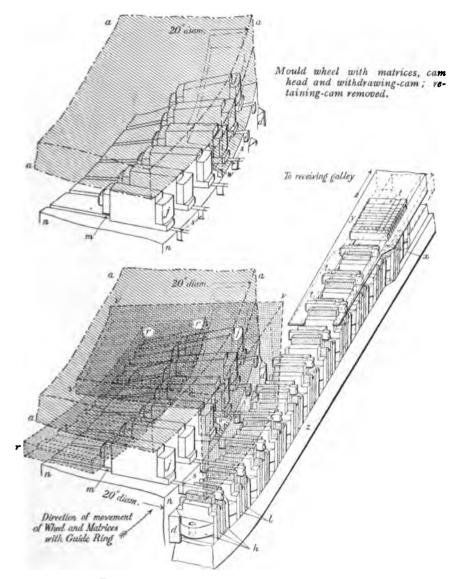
Wicks rotary typecaster ; delivery of type.
